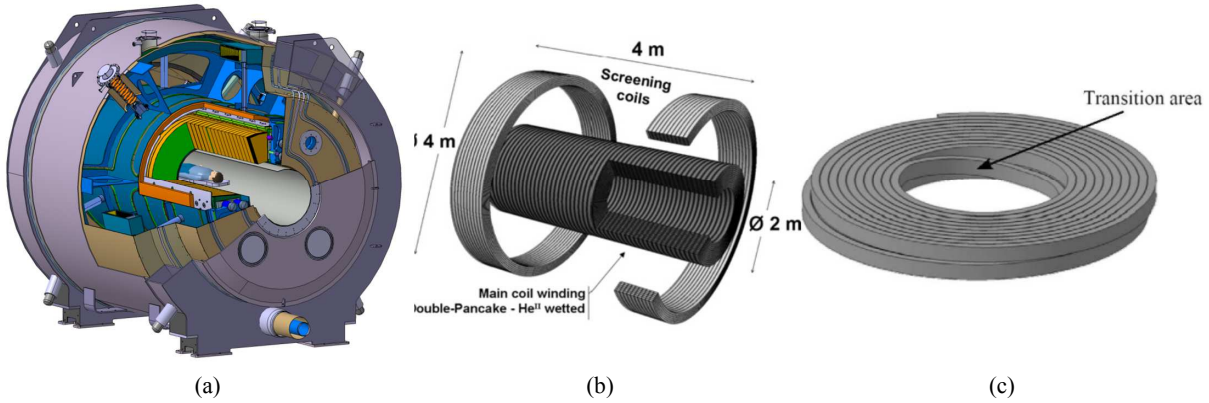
Iseult MRI: (a) Cut-away view of the magnet and cryostat assembly, (b) main coil winding and (c) geometry of the DP
